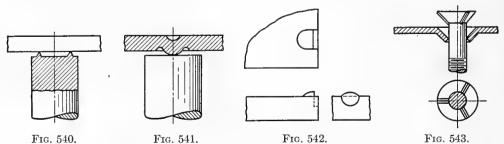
A ring projection can be turned or coined on the shaft in order to localize the welding area.
